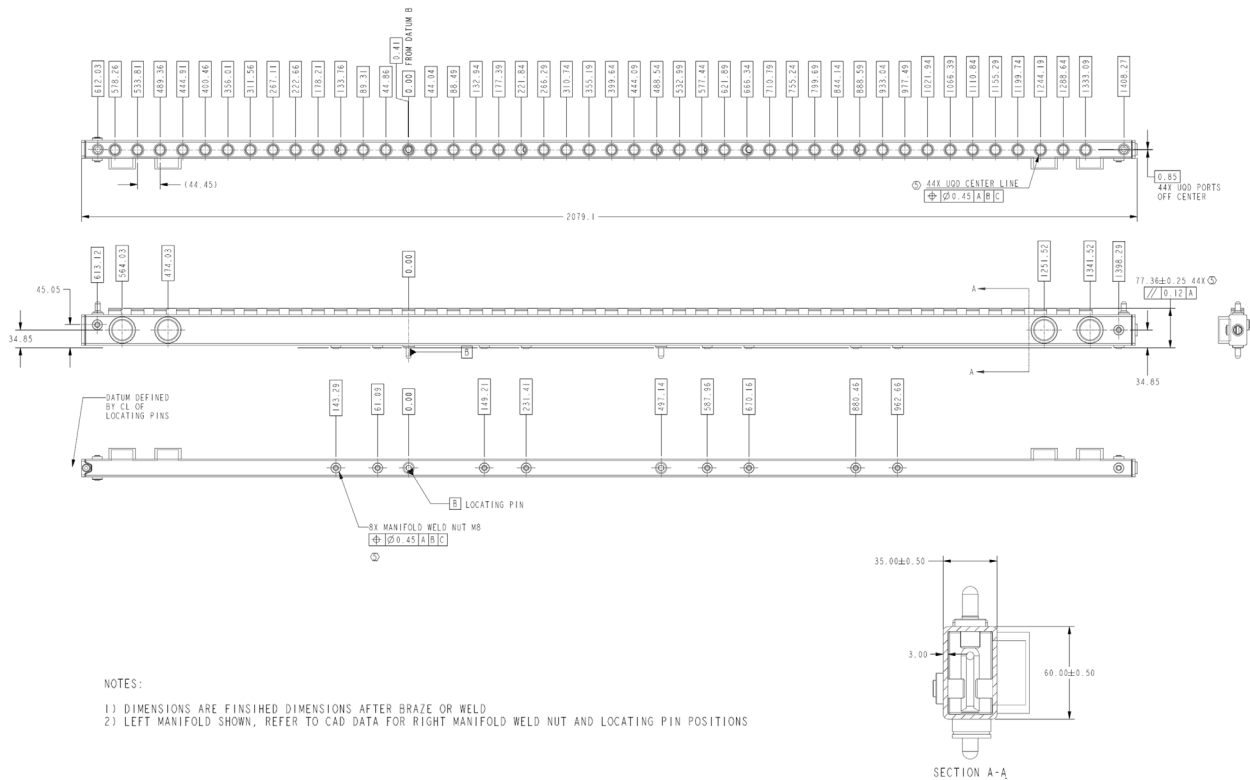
MGX Rack Manifold Drawing – Main Tube Assembly
